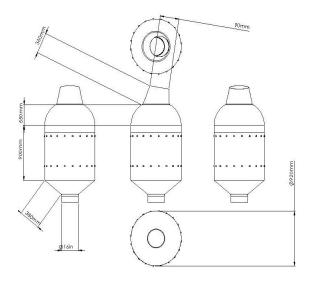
Orthographic Projection Showing Top View, Side Views and Bottom View of Converter
